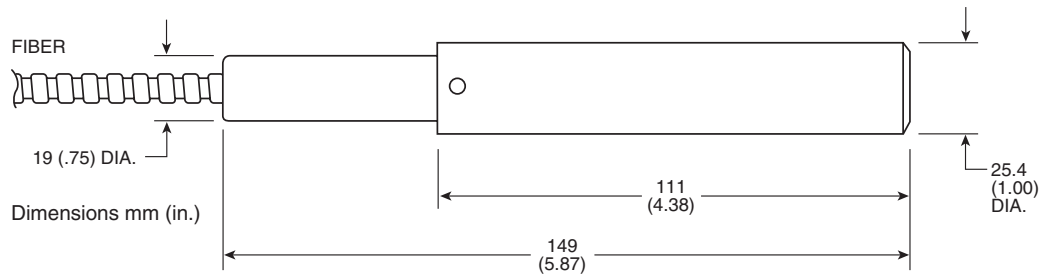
Optical Lens Assembly (L1) .19" @ 20" FOV
